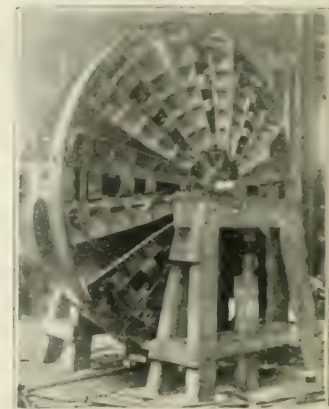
C.P.R. Heavy Rotary Snow Plough Wheel, being balanced.
